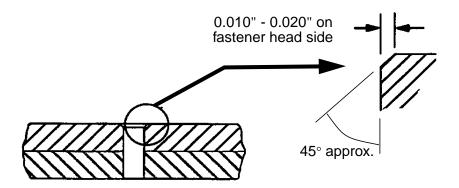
Chamfer for Proper Seating of Flat Head Rivets
